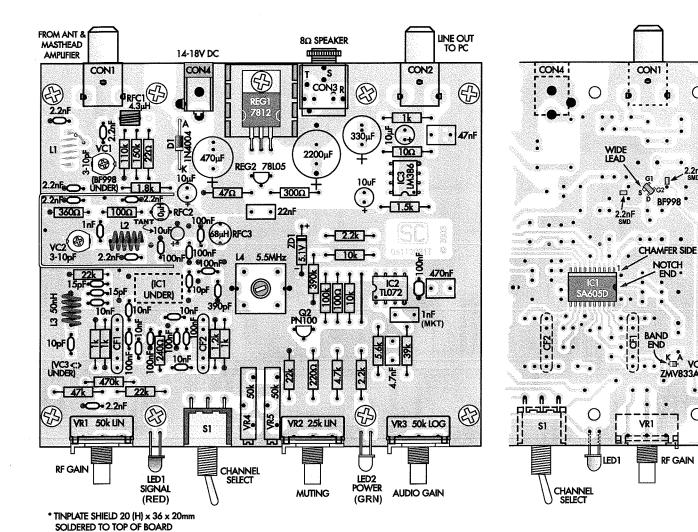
install the parts in the top of the PC board as shown here. Note that S1 is not directly soldered to the board but is instead connected to three PC stakes using flying leads (Refer also to Fig.9).
